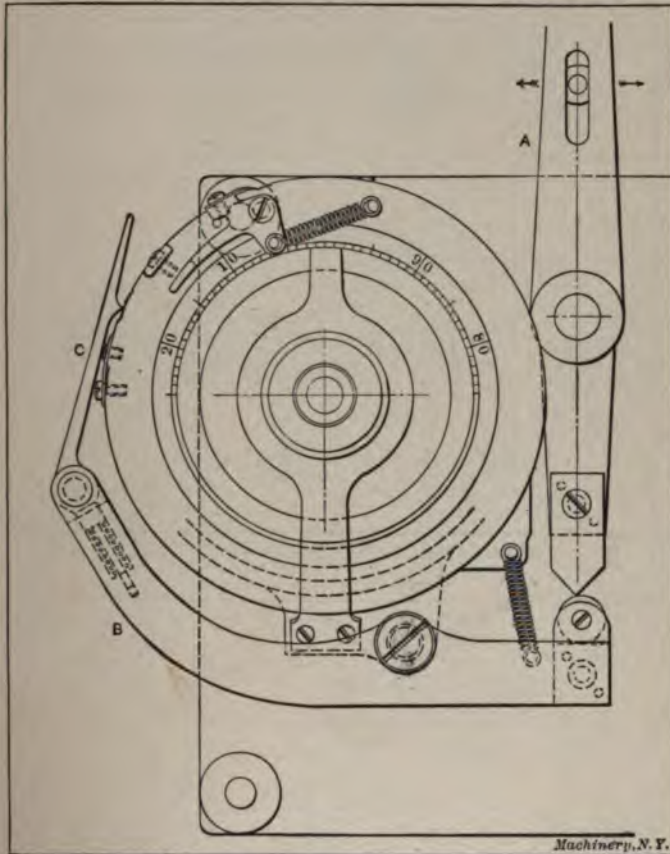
Combined Reversing and Feeding Mechanism for Grinding Machine
